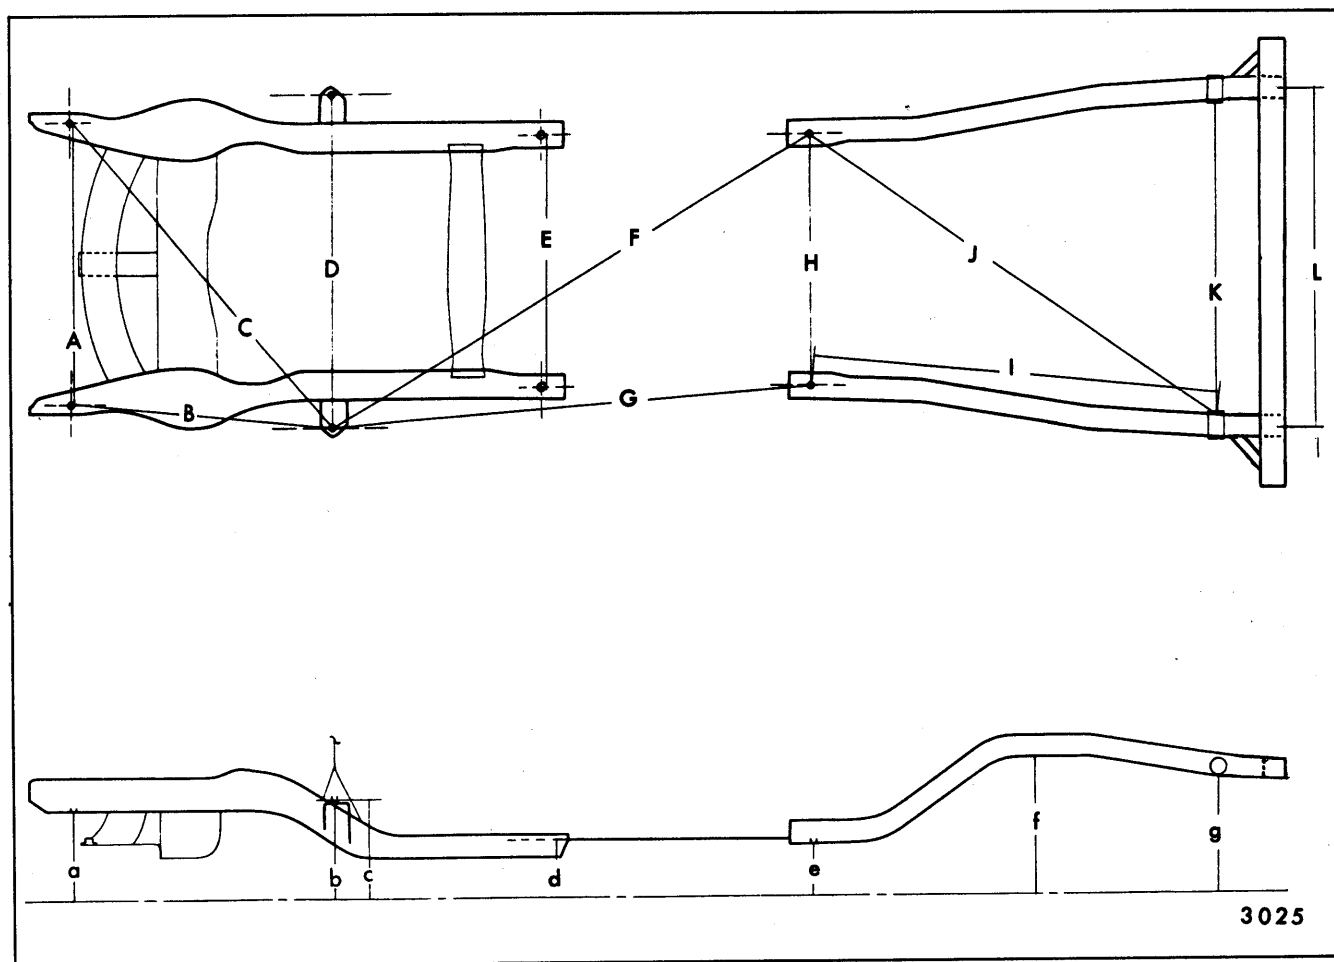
Horizontal & Vertical Checking Dimensions (Chevy Nova & Acadian "X" Bodies)
